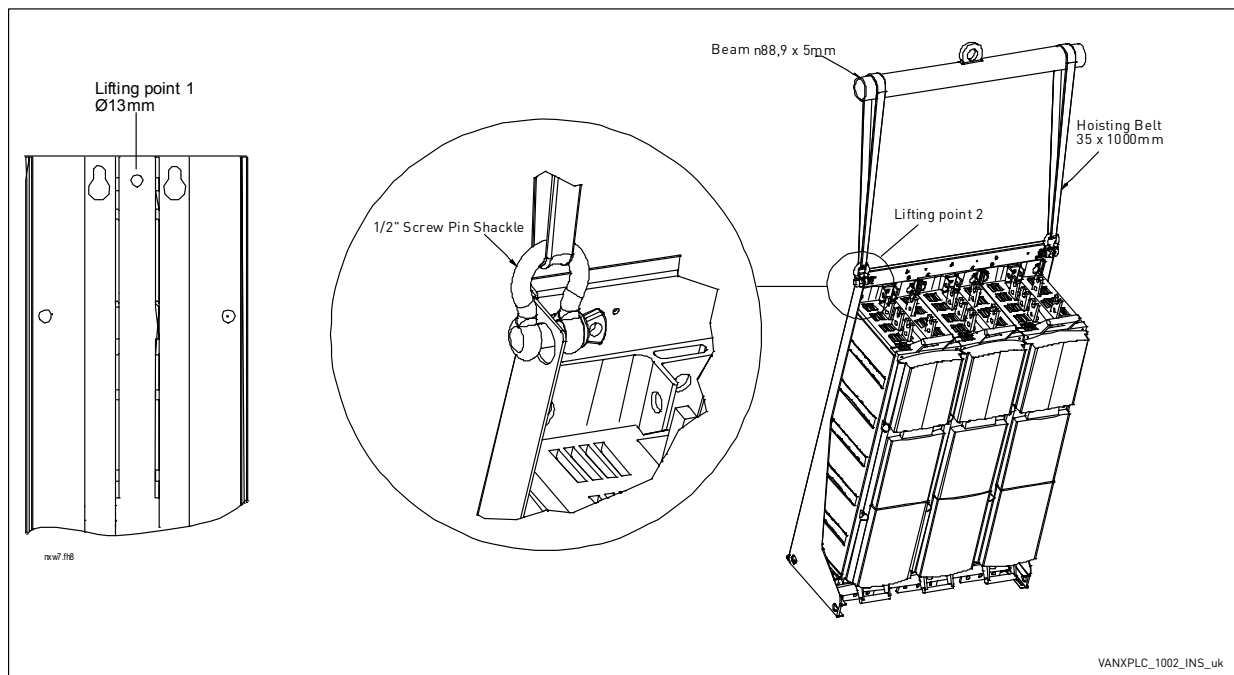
Lifting points for drives consisting of one module (left) and several modules
